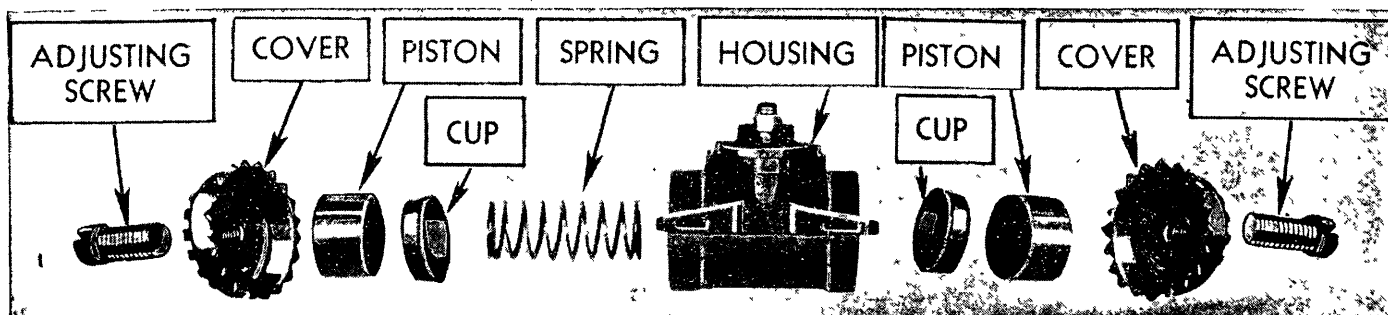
Exploded view of wheel cylinder with metal end covers and adjusting screws
